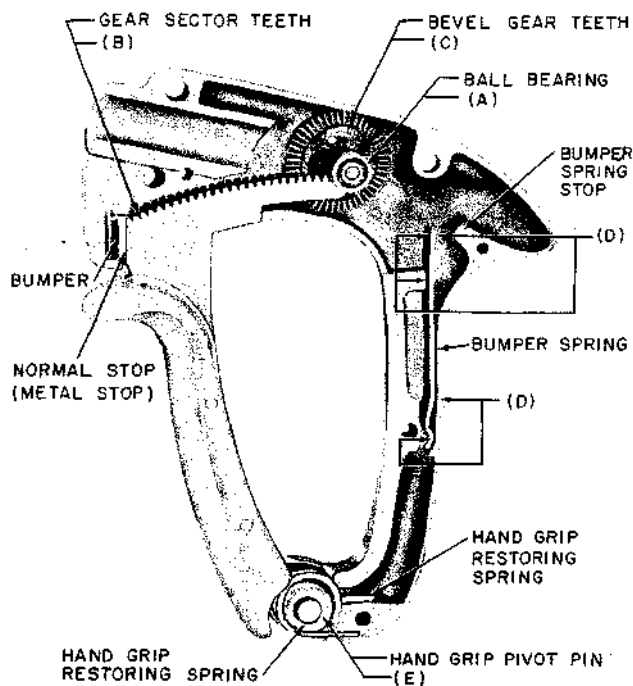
KS-16363 L1 Hand Wire-Wrapping Tool—Interior View Showing Gearing and Associated Parts
